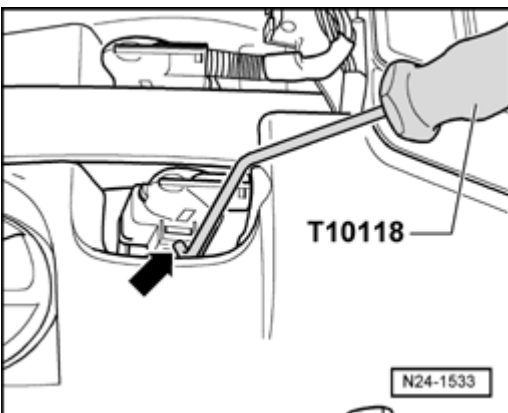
Identifying Assembly Tool T10118 On Release Button
